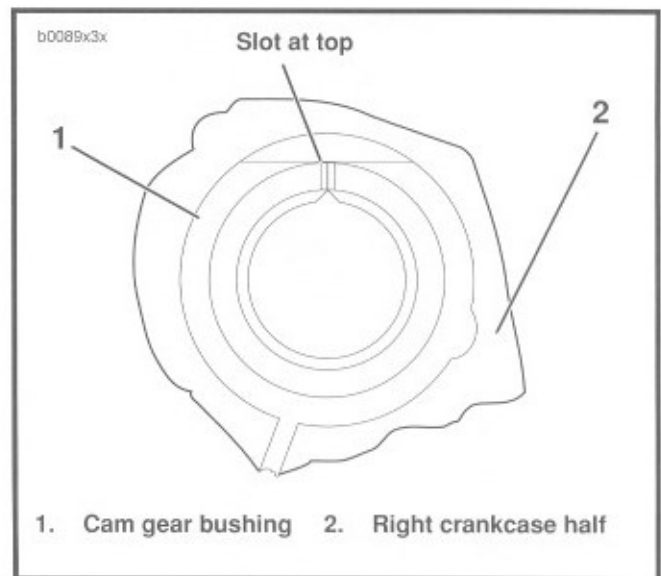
Cam Gear Bushing Installed in Crankcase
